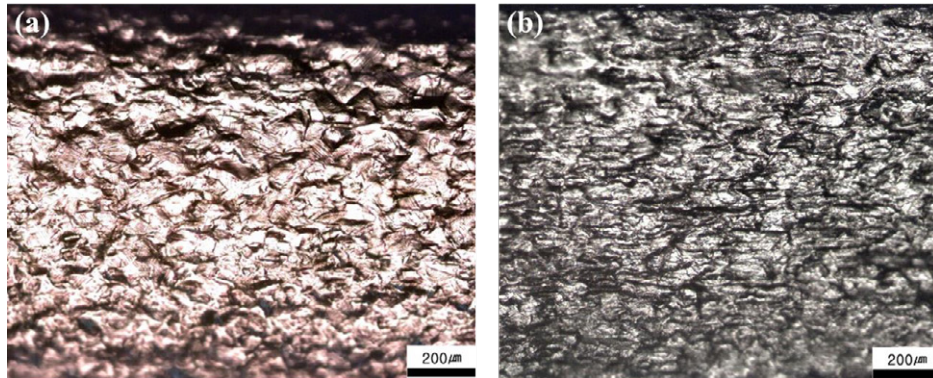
Optical images of the side surfaces of (a) 0Al and (b) 1.5Al tensile specimens after tensile tests. The side surfaces were mirror-polished before tensile testing.
